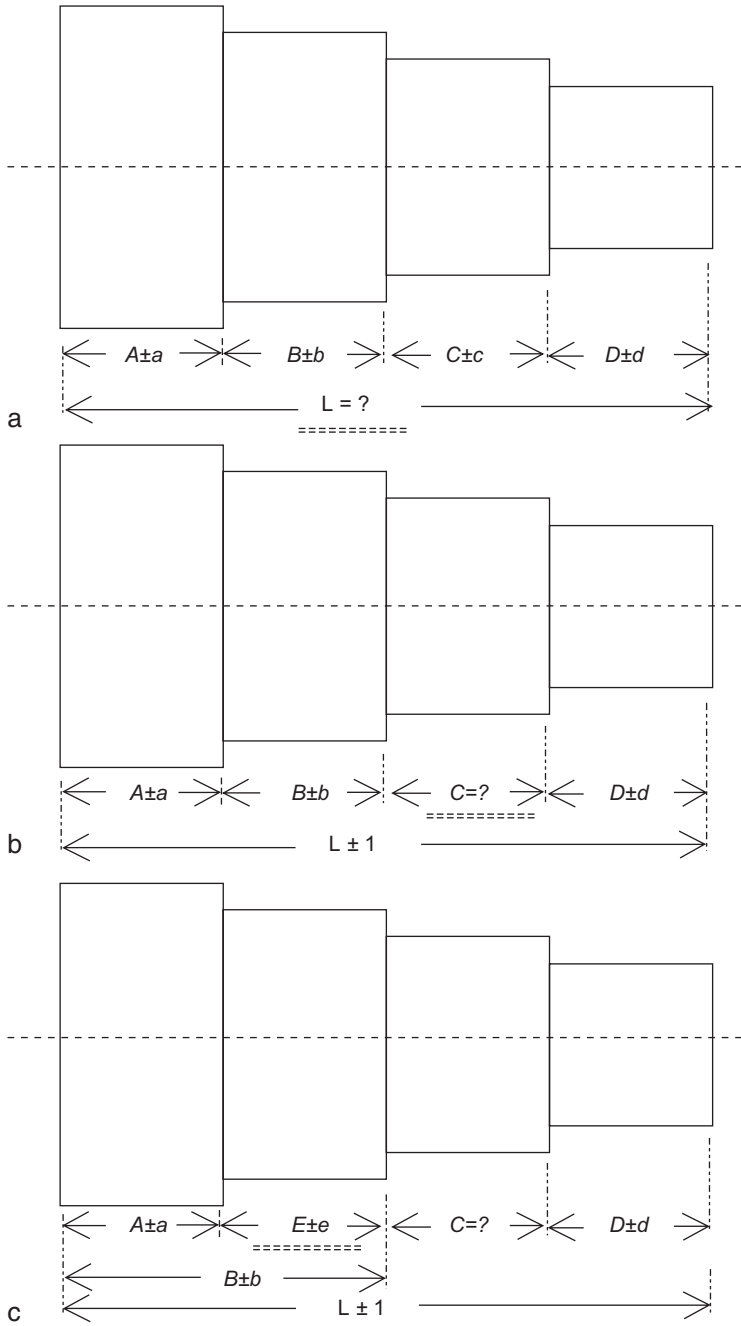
Dimensioning method effect on tolerance stack-up
